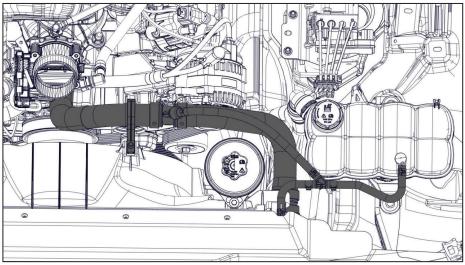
Shift coolant hose assembly (single battery degas bottle shown)
